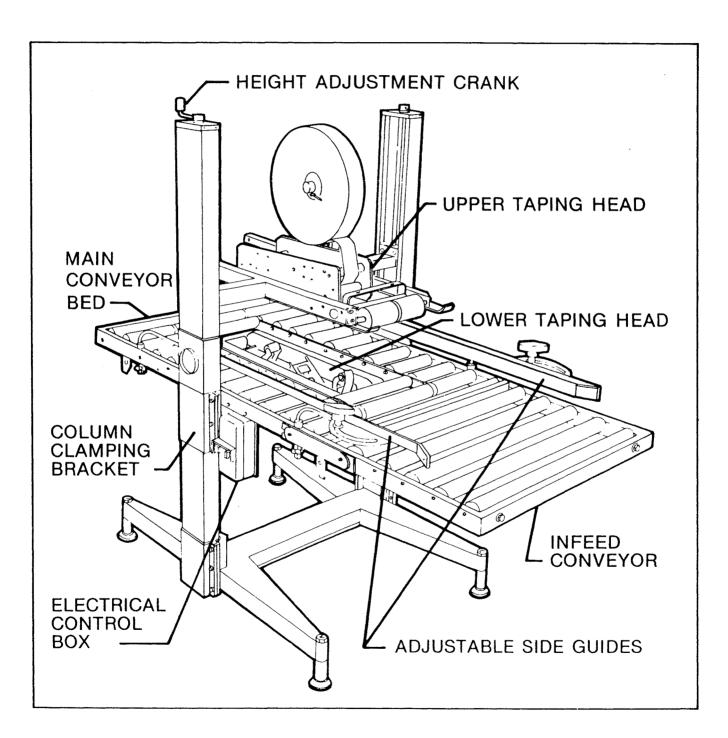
SET-UP INSTRUCTIONS - BOX SEALER COMPONENTS - LEFT FRONT VIEW
